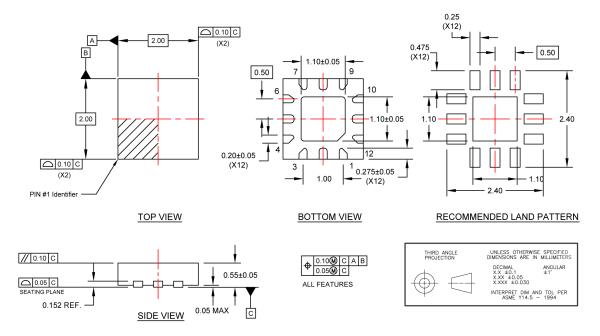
Package Drawing 12-lead $2 \times 2 \times 0.55$ mm QFN
